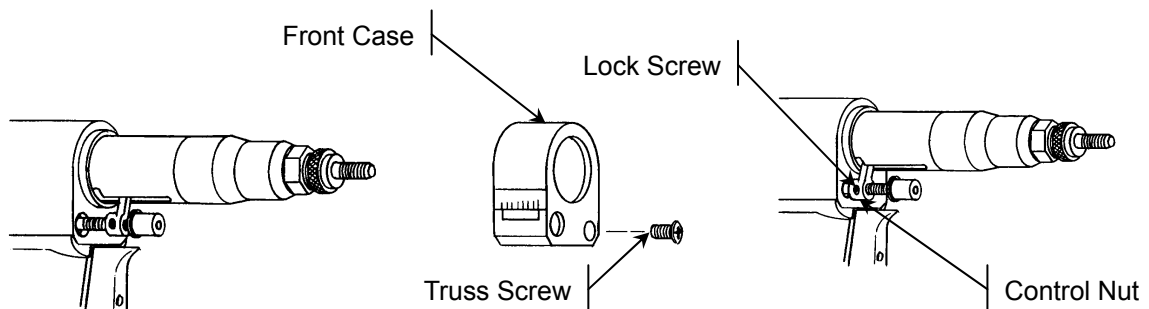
Replacing the Control Nut and T-Valve Push Rod
